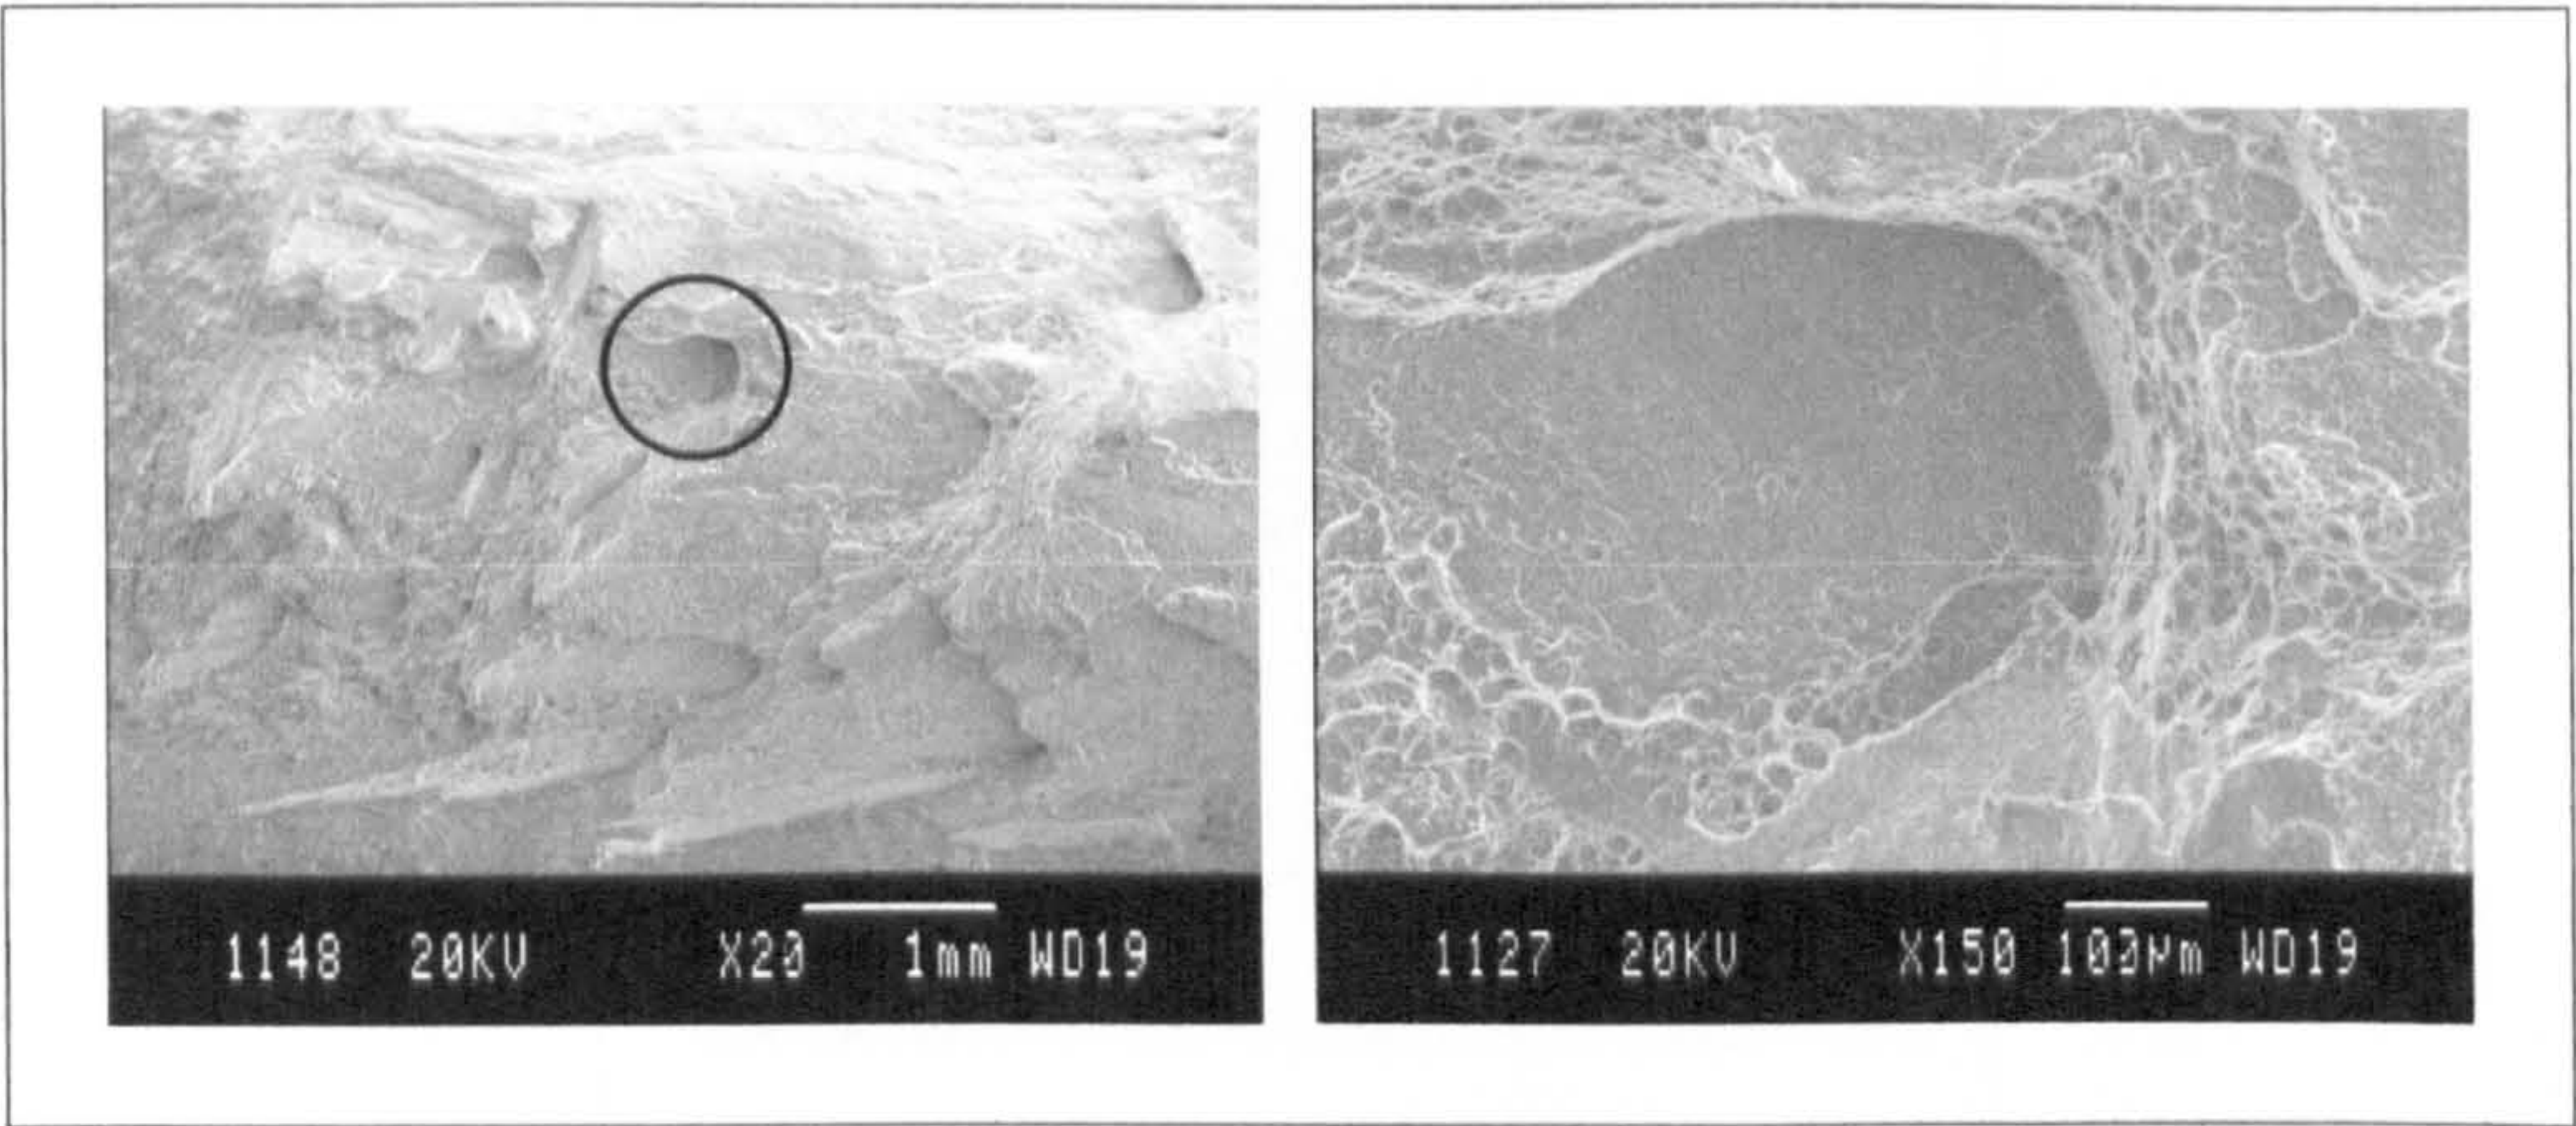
Weld nugget PFD on the fast fracture surface (left) and higher magnification view of highlighted area (right), (FS SP 3).
